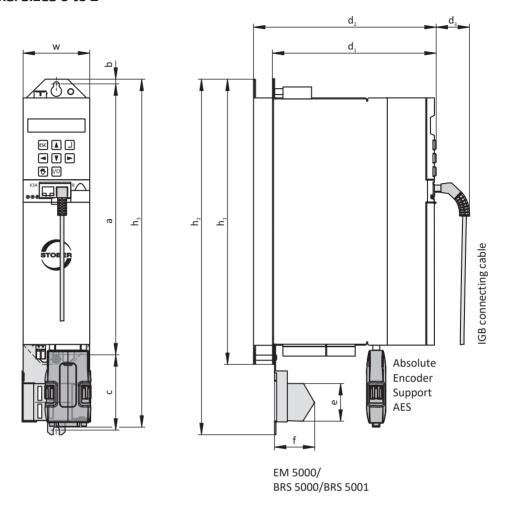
SDS 5000 dimensional drawing, sizes 0 to 2
